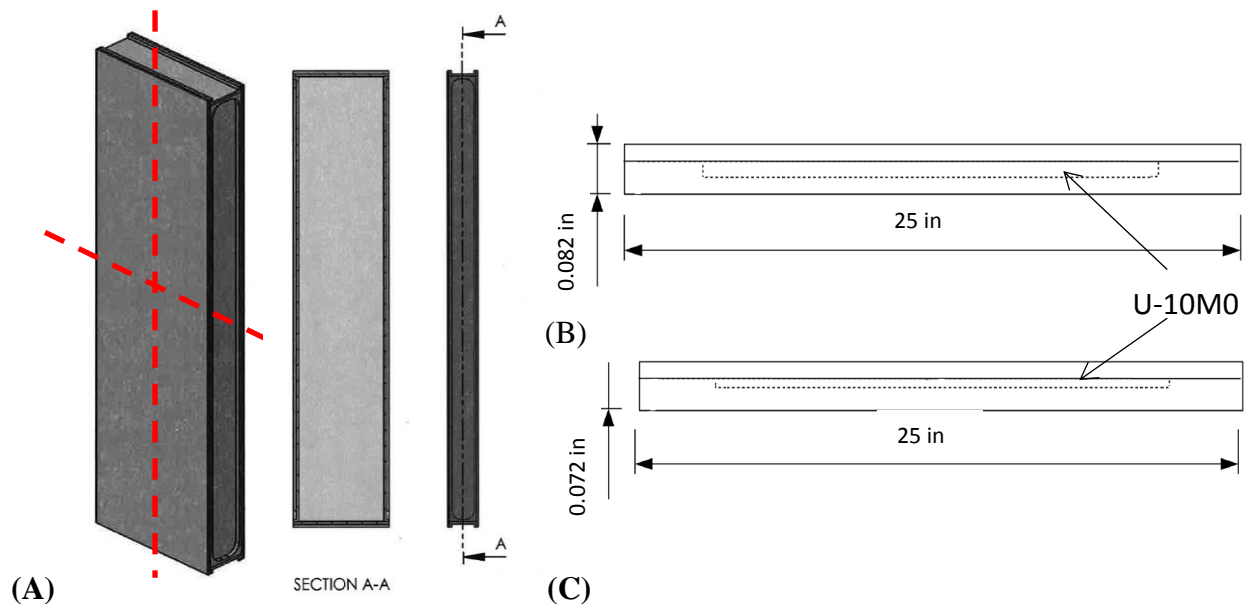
A schematic showing the designs of (A) HIP can baseline design.(B) Al cladding with deep pocket and U-10Mo assembly and (C) Al cladding with shallow pocket and U-10Mo assembly.
